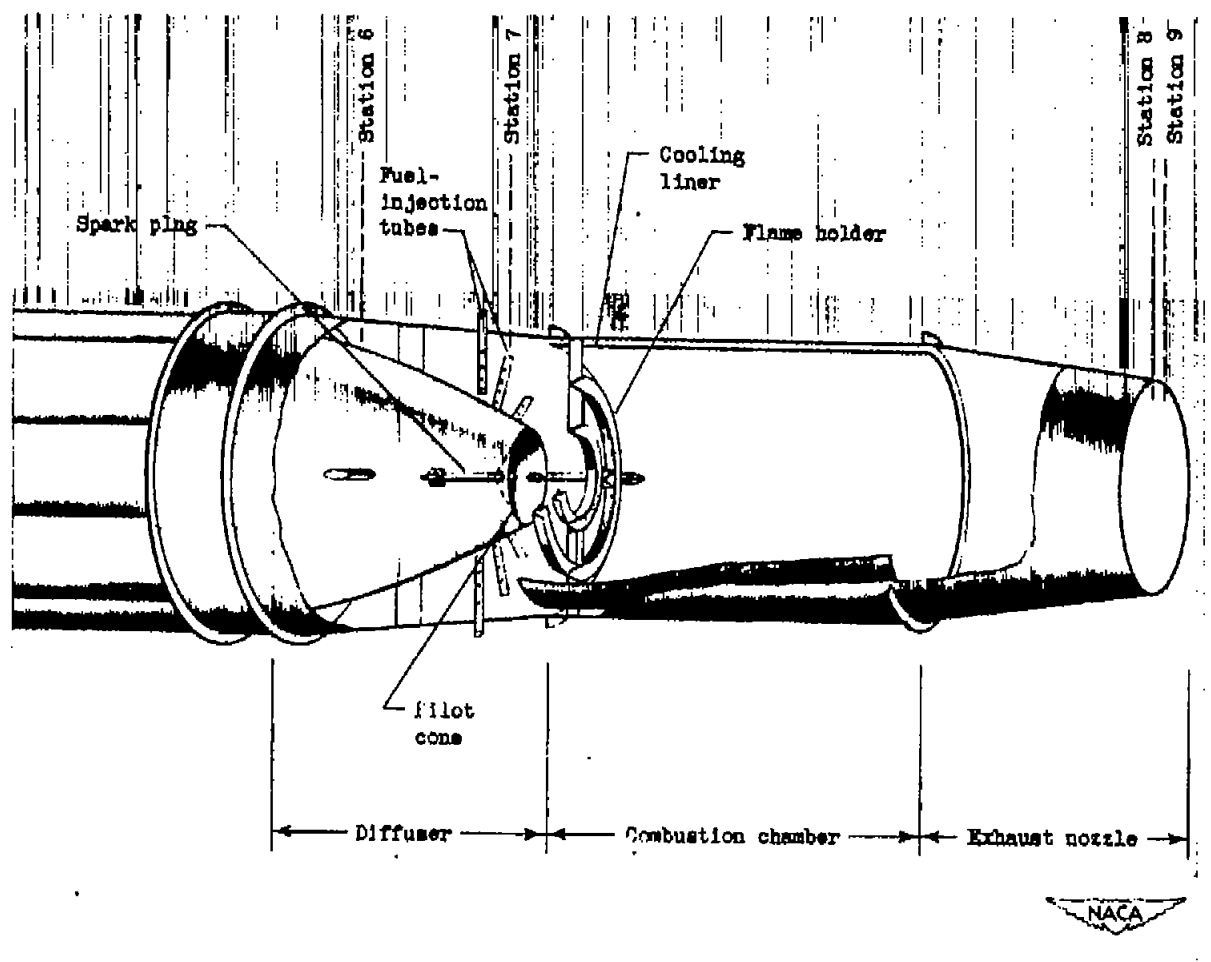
Cross-sectional view of typical tail-pipe-burner assembly.
